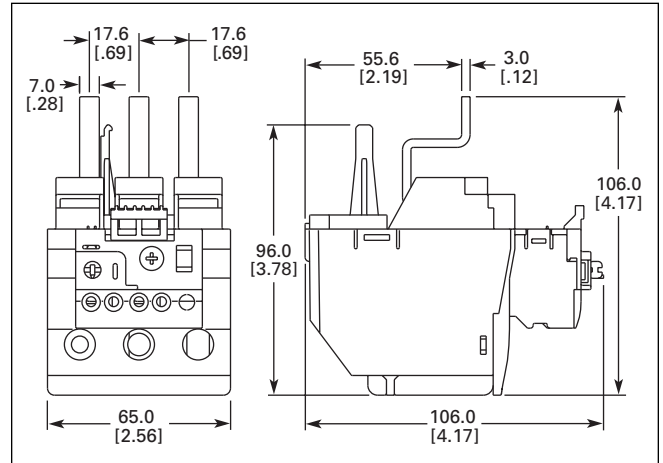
65 mm C396 (15 – 75A) Direct Connect to XT Frame D Contactor — Approximate Dimensions in mm [in]
